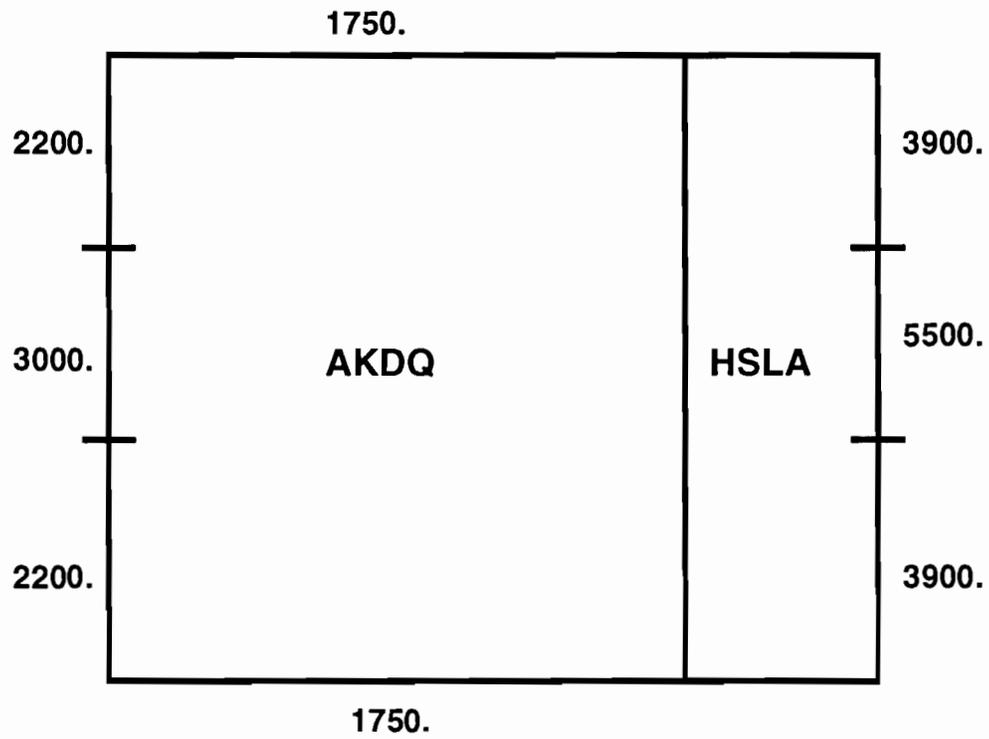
The blank holder forces fit to experiment used around the edge of the blank for the blank with the weld located 4" from center, no lubrication.
